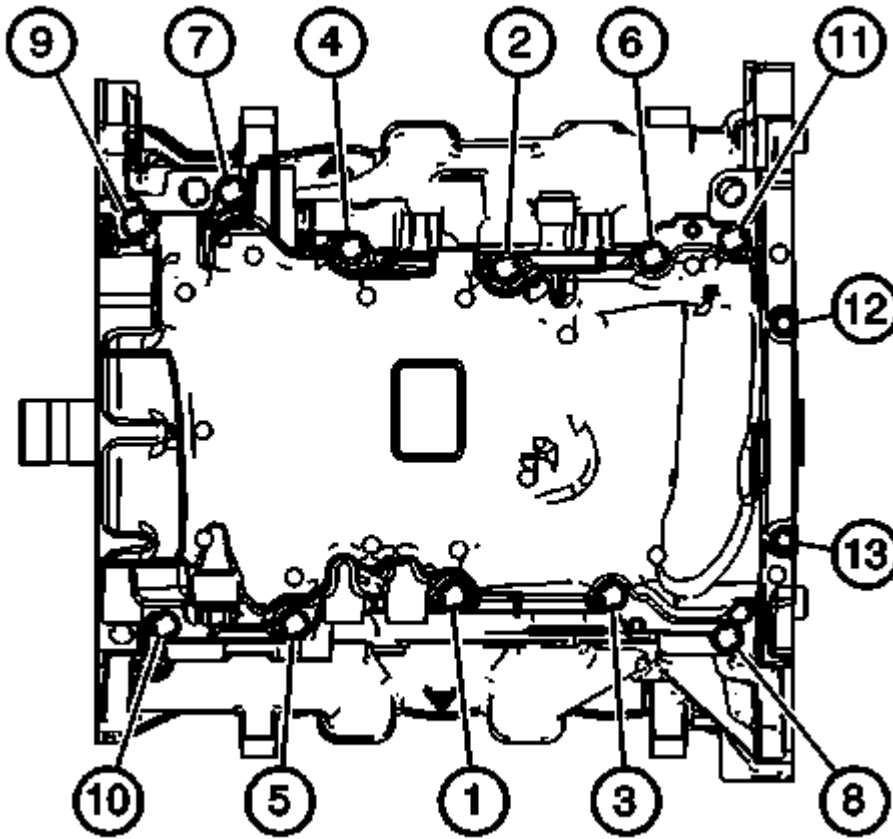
Identifying Oil Pan Bolt Tightening Sequence
